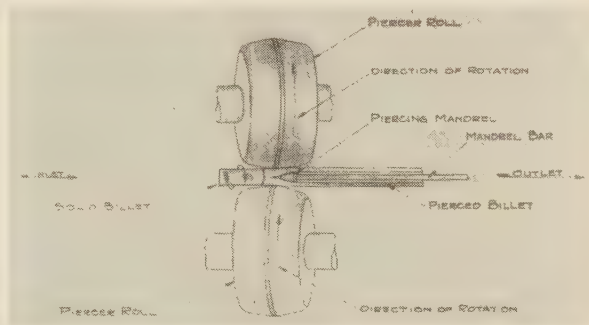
CROSS-ROLLING METHOD FOR MANUFACTURING SEAMLESS HOLLOW BILLETS
